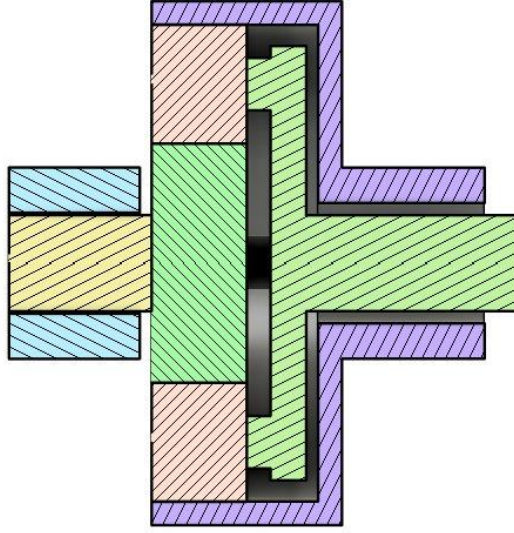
Planetary gear configuration with motor connected to the sun gear.
